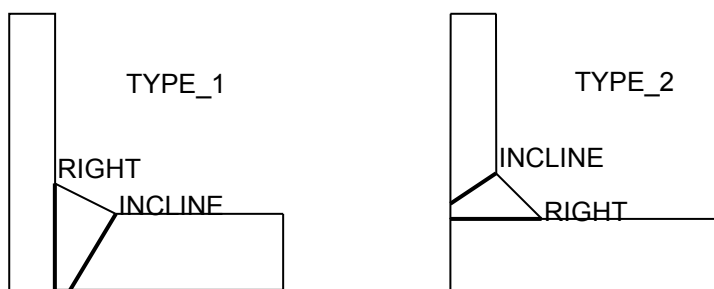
a: Definition of the position of a crack according to the type of the welding
